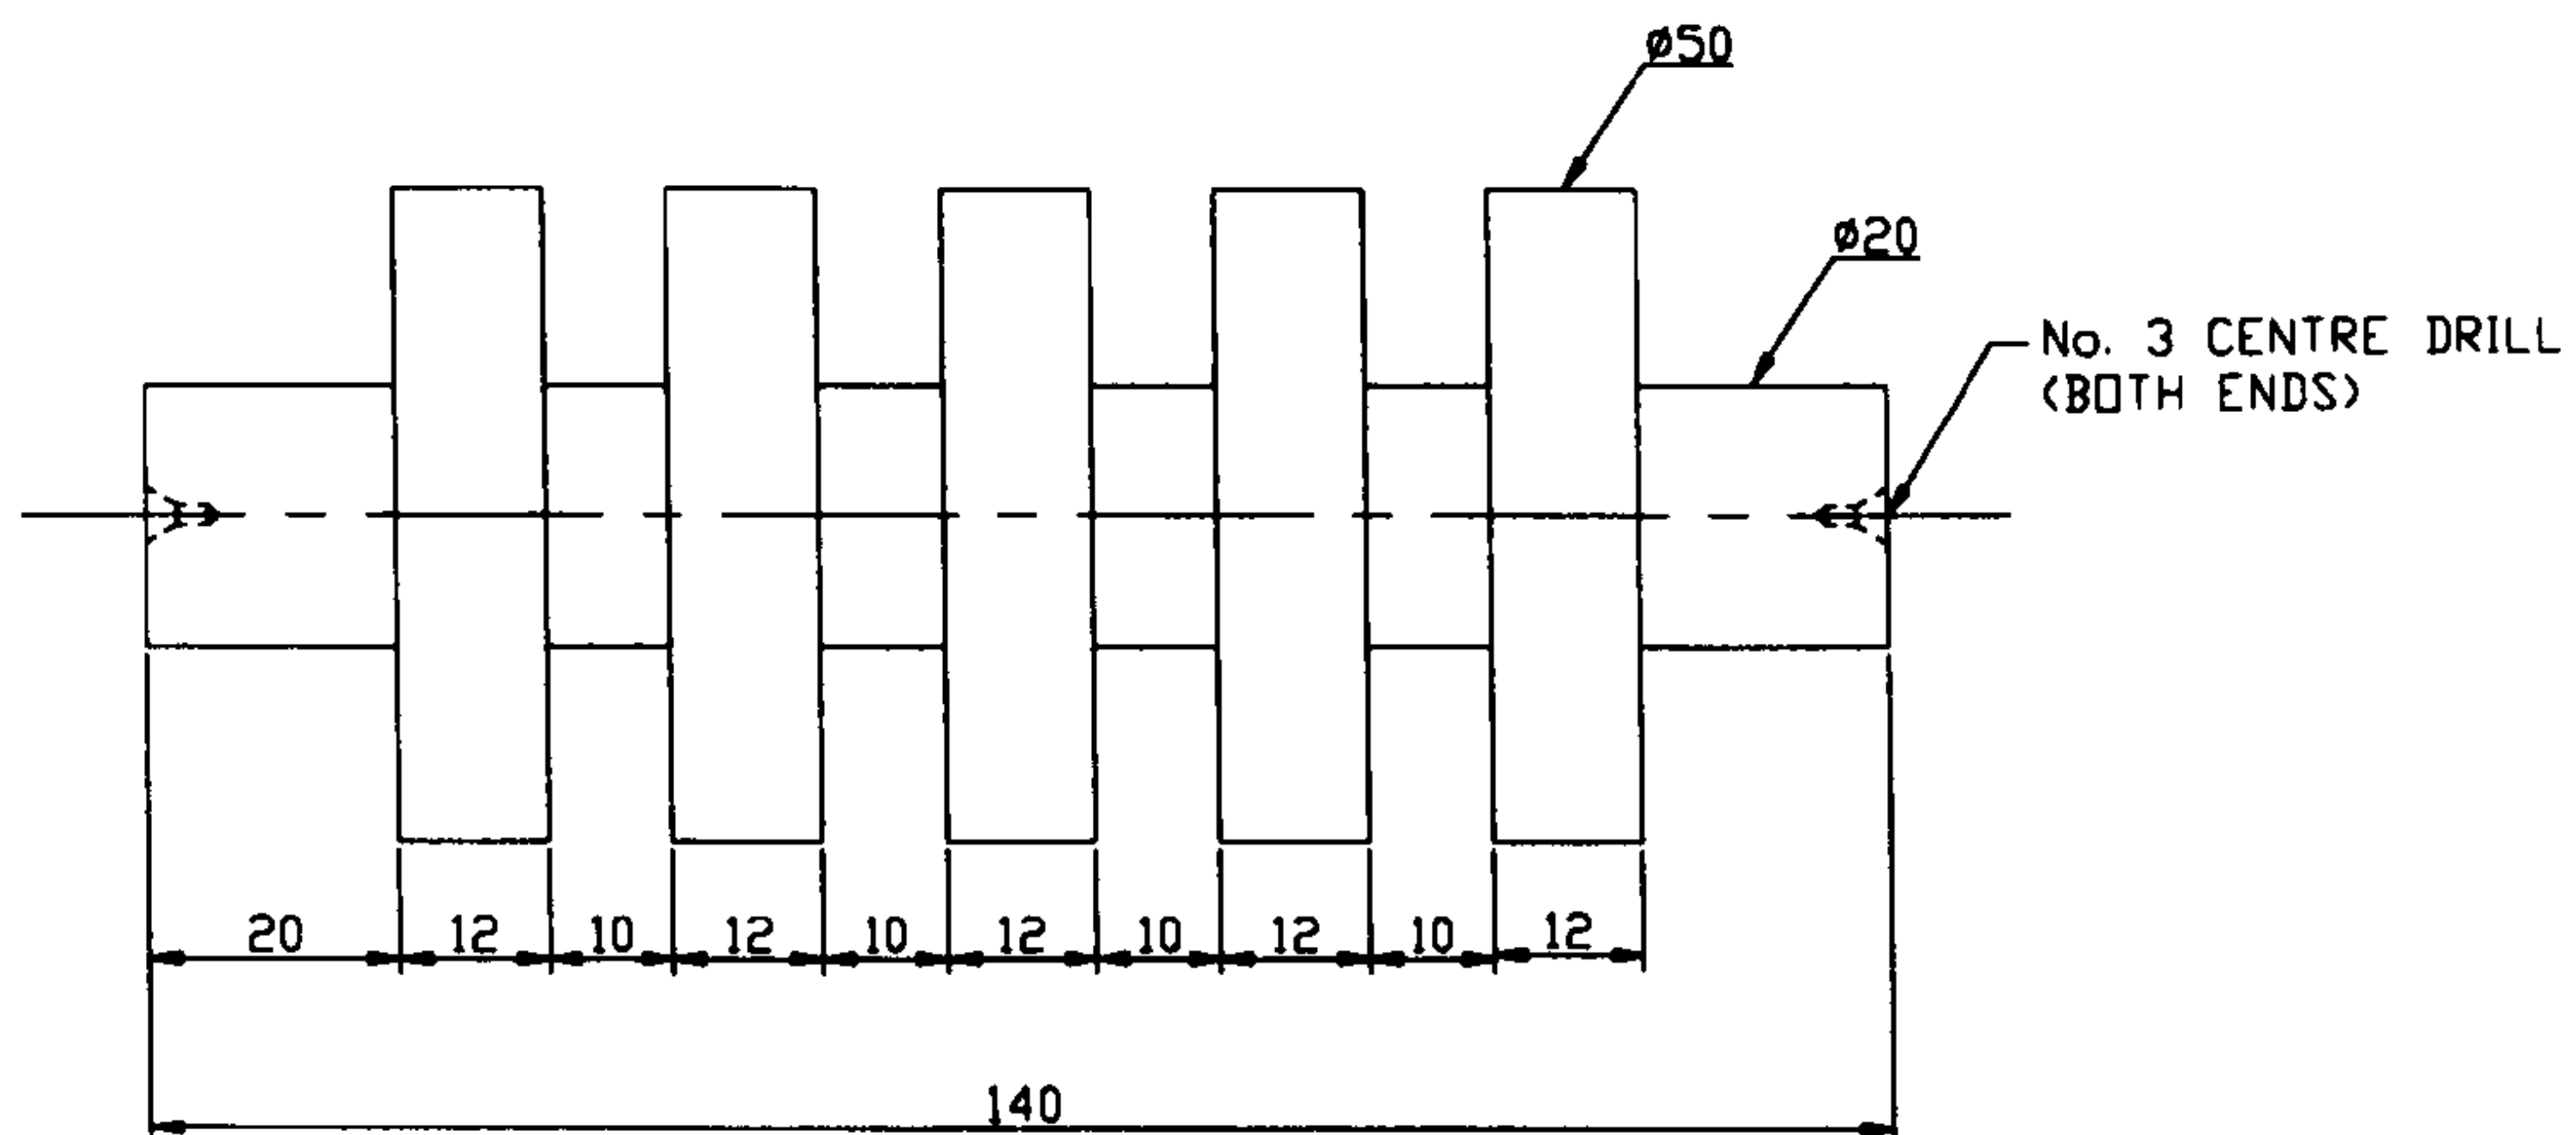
Inconel 718 workpiece, 62 HRC. All sizes are shown in mm.
